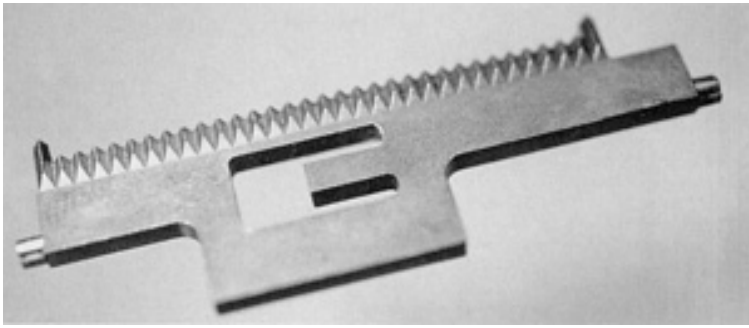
Paper tape cutter for a postage meter, formed out of tool steel
